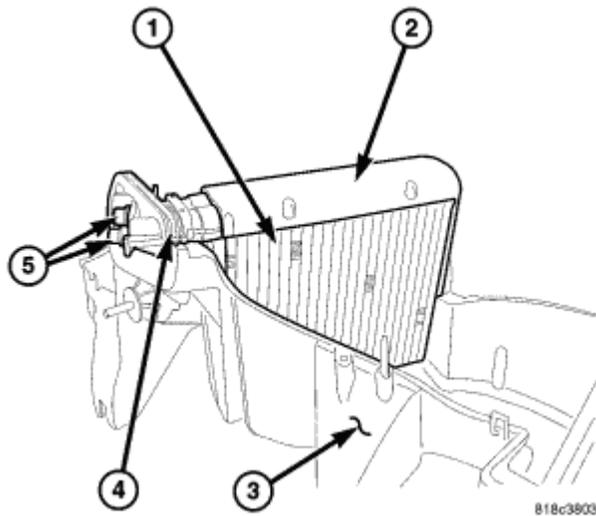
A/C Evaporator, Foam Insulator, HVAC Housing, Rubber Seal & Tapping Block
